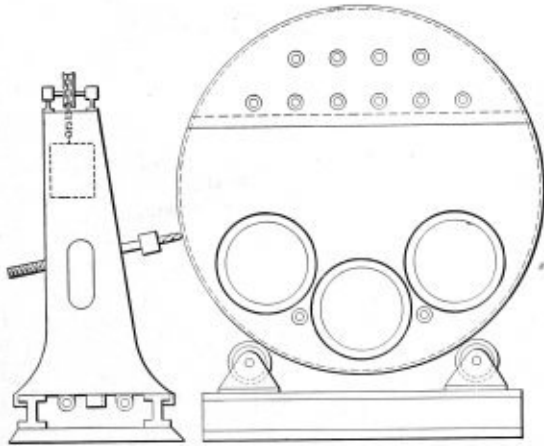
BOILER ON RADIAL DRILLING MACHINE.
